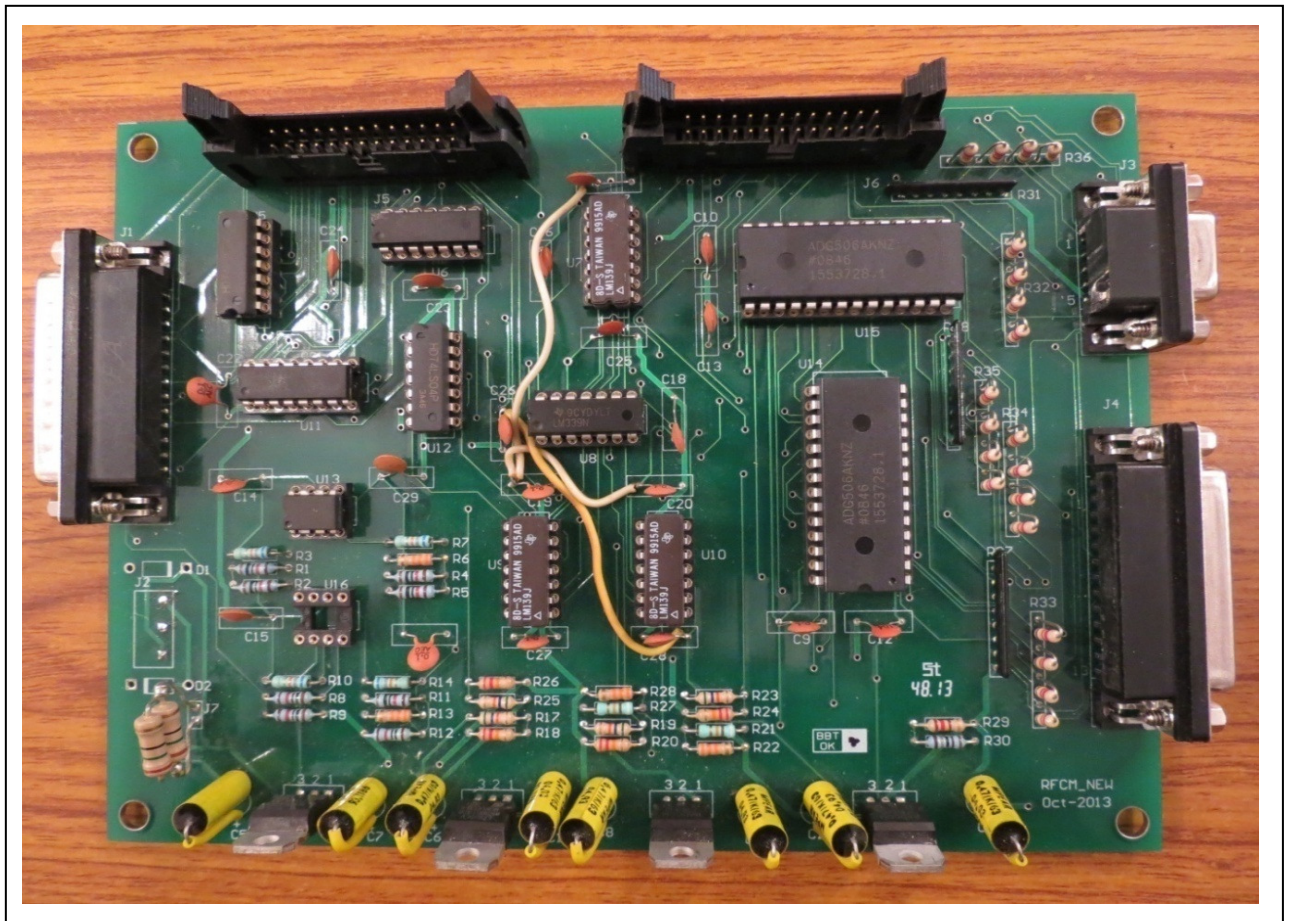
(a) Assembled RFCM card Ver.1 Top View.
